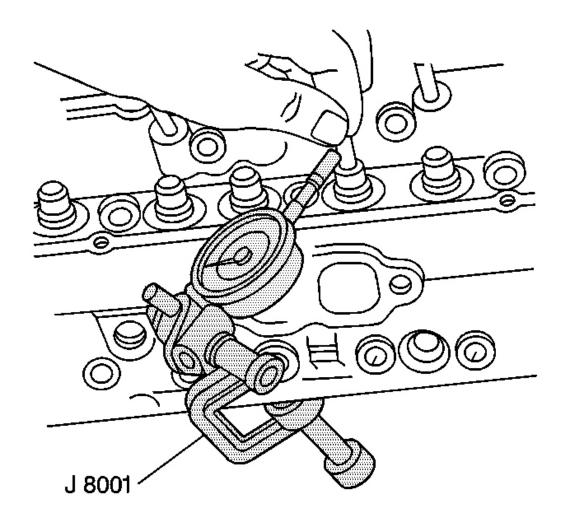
Measuring Valve Stem-To-Guide Clearance Using J 8001 Courtesy of GENERAL MOTORS CORP.
